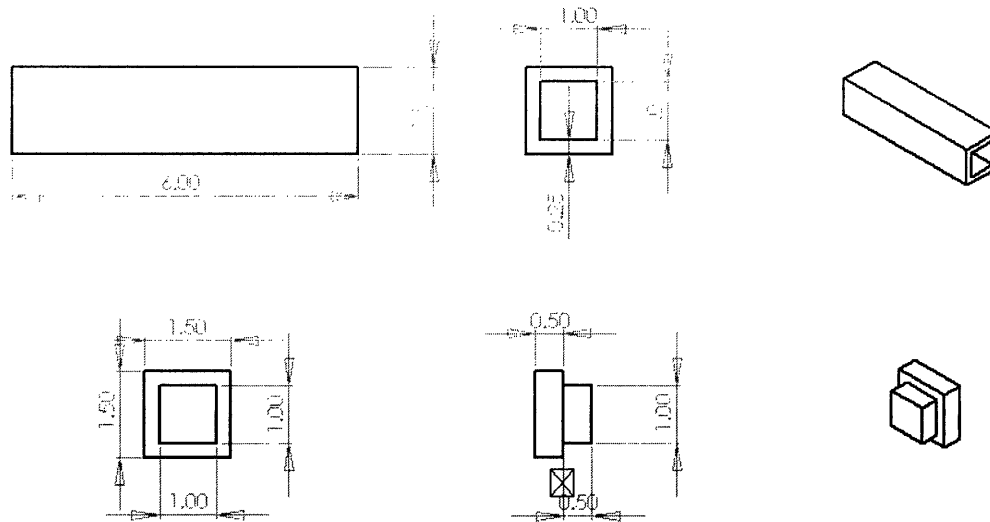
Drawing and dimensions for the spring housing and spring cap
